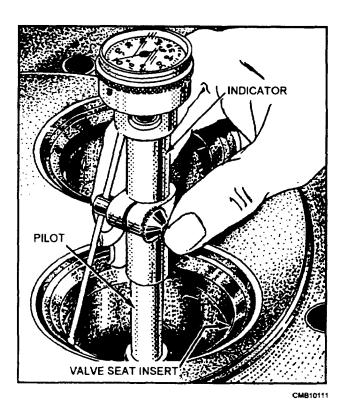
Determining concentricity of the valve seat with a valve seat dial indicator.
